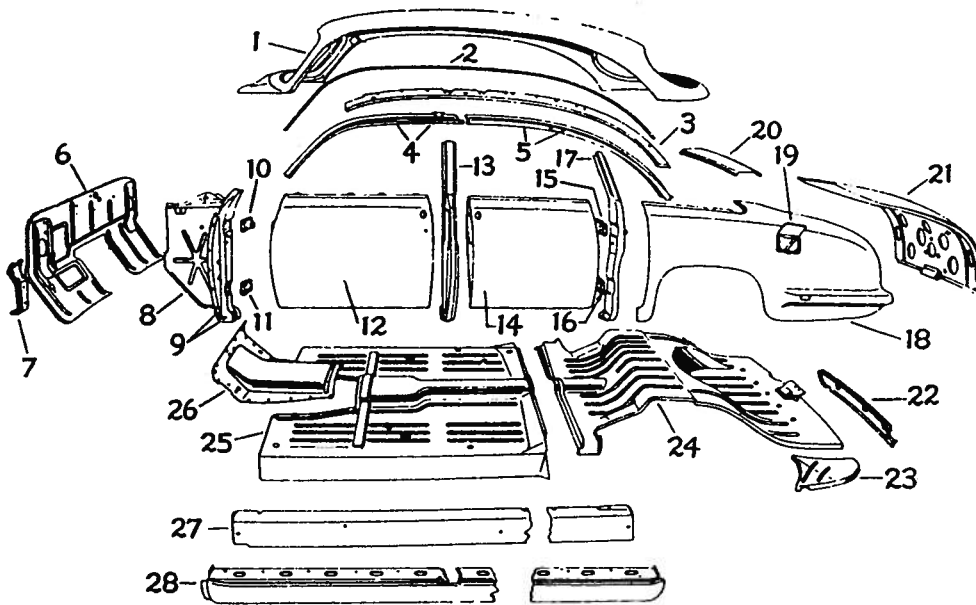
Body Sheet Metal & Fuel Tank—4-Door
